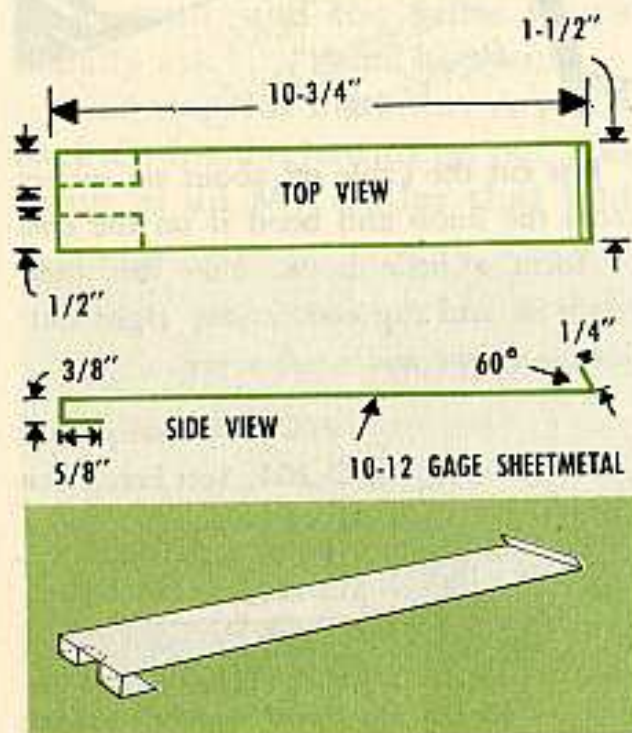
3/4-ton M37 brake springs come out easier if you anchor pliers to this guide.
